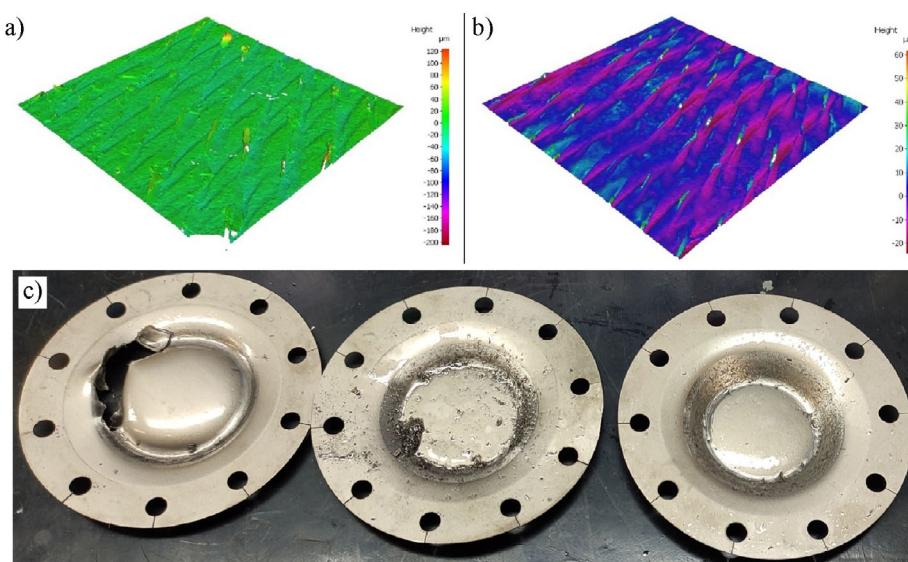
Topography of the inner surface of drawpieces formed with a cemented carbide tool with a spiral grooves: a) oil-based heating + rape-seed oil, b) oil-based heating + MoS_2 and c) damaged drawpieces due to the use of tools with lubrication grooves
